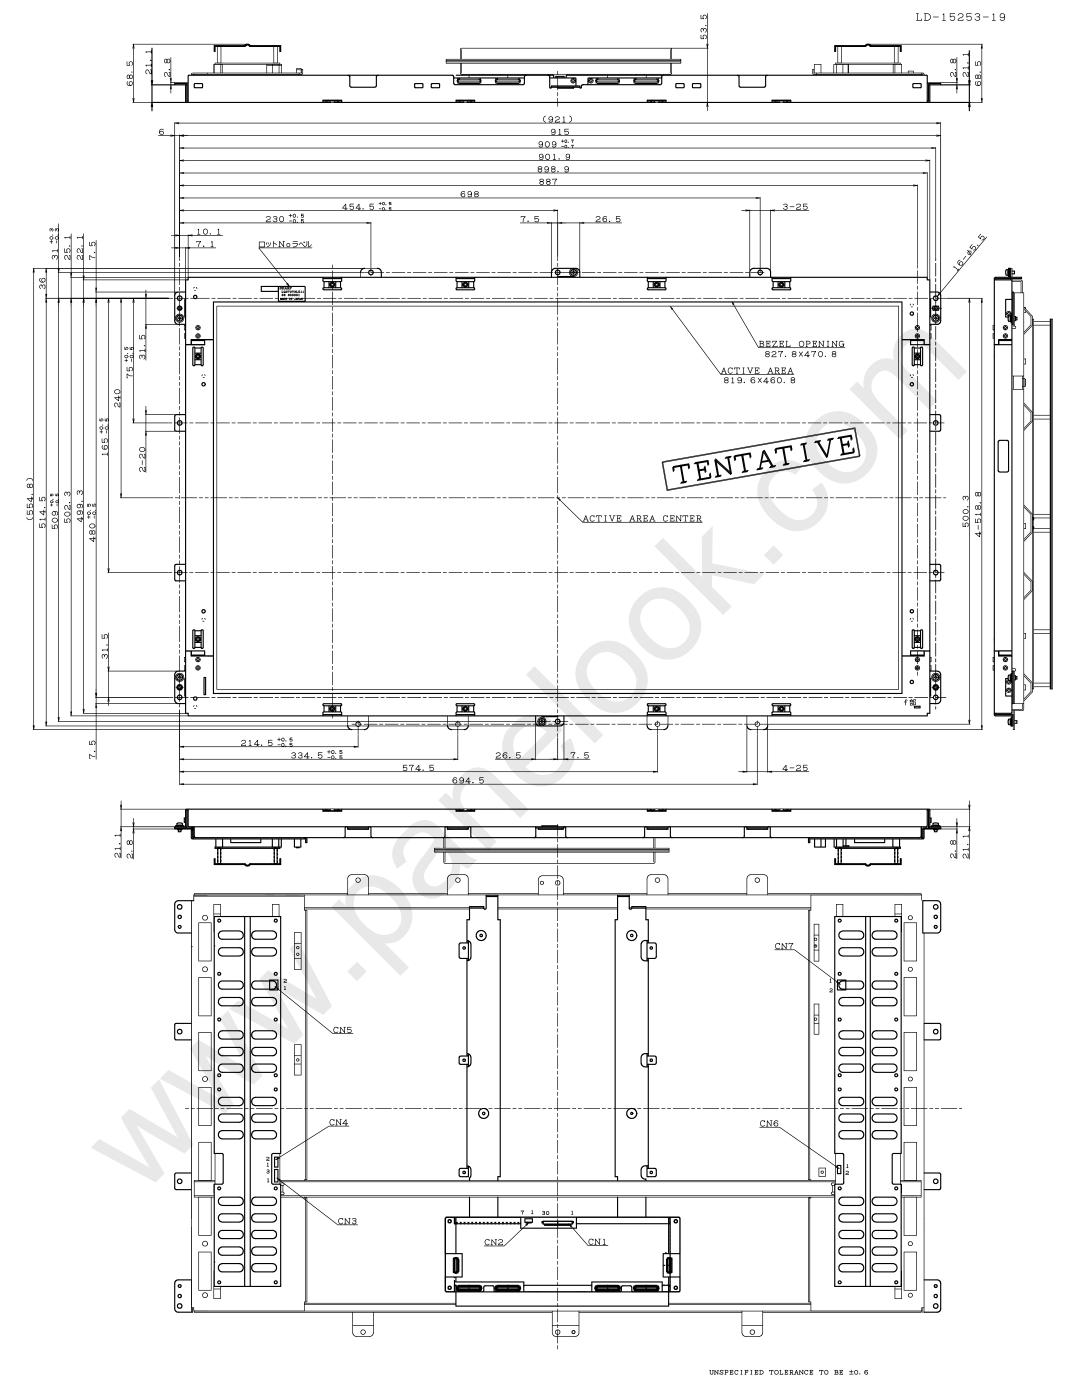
OUTLINE DIMENSIONS (LQ370T3LZ11)
